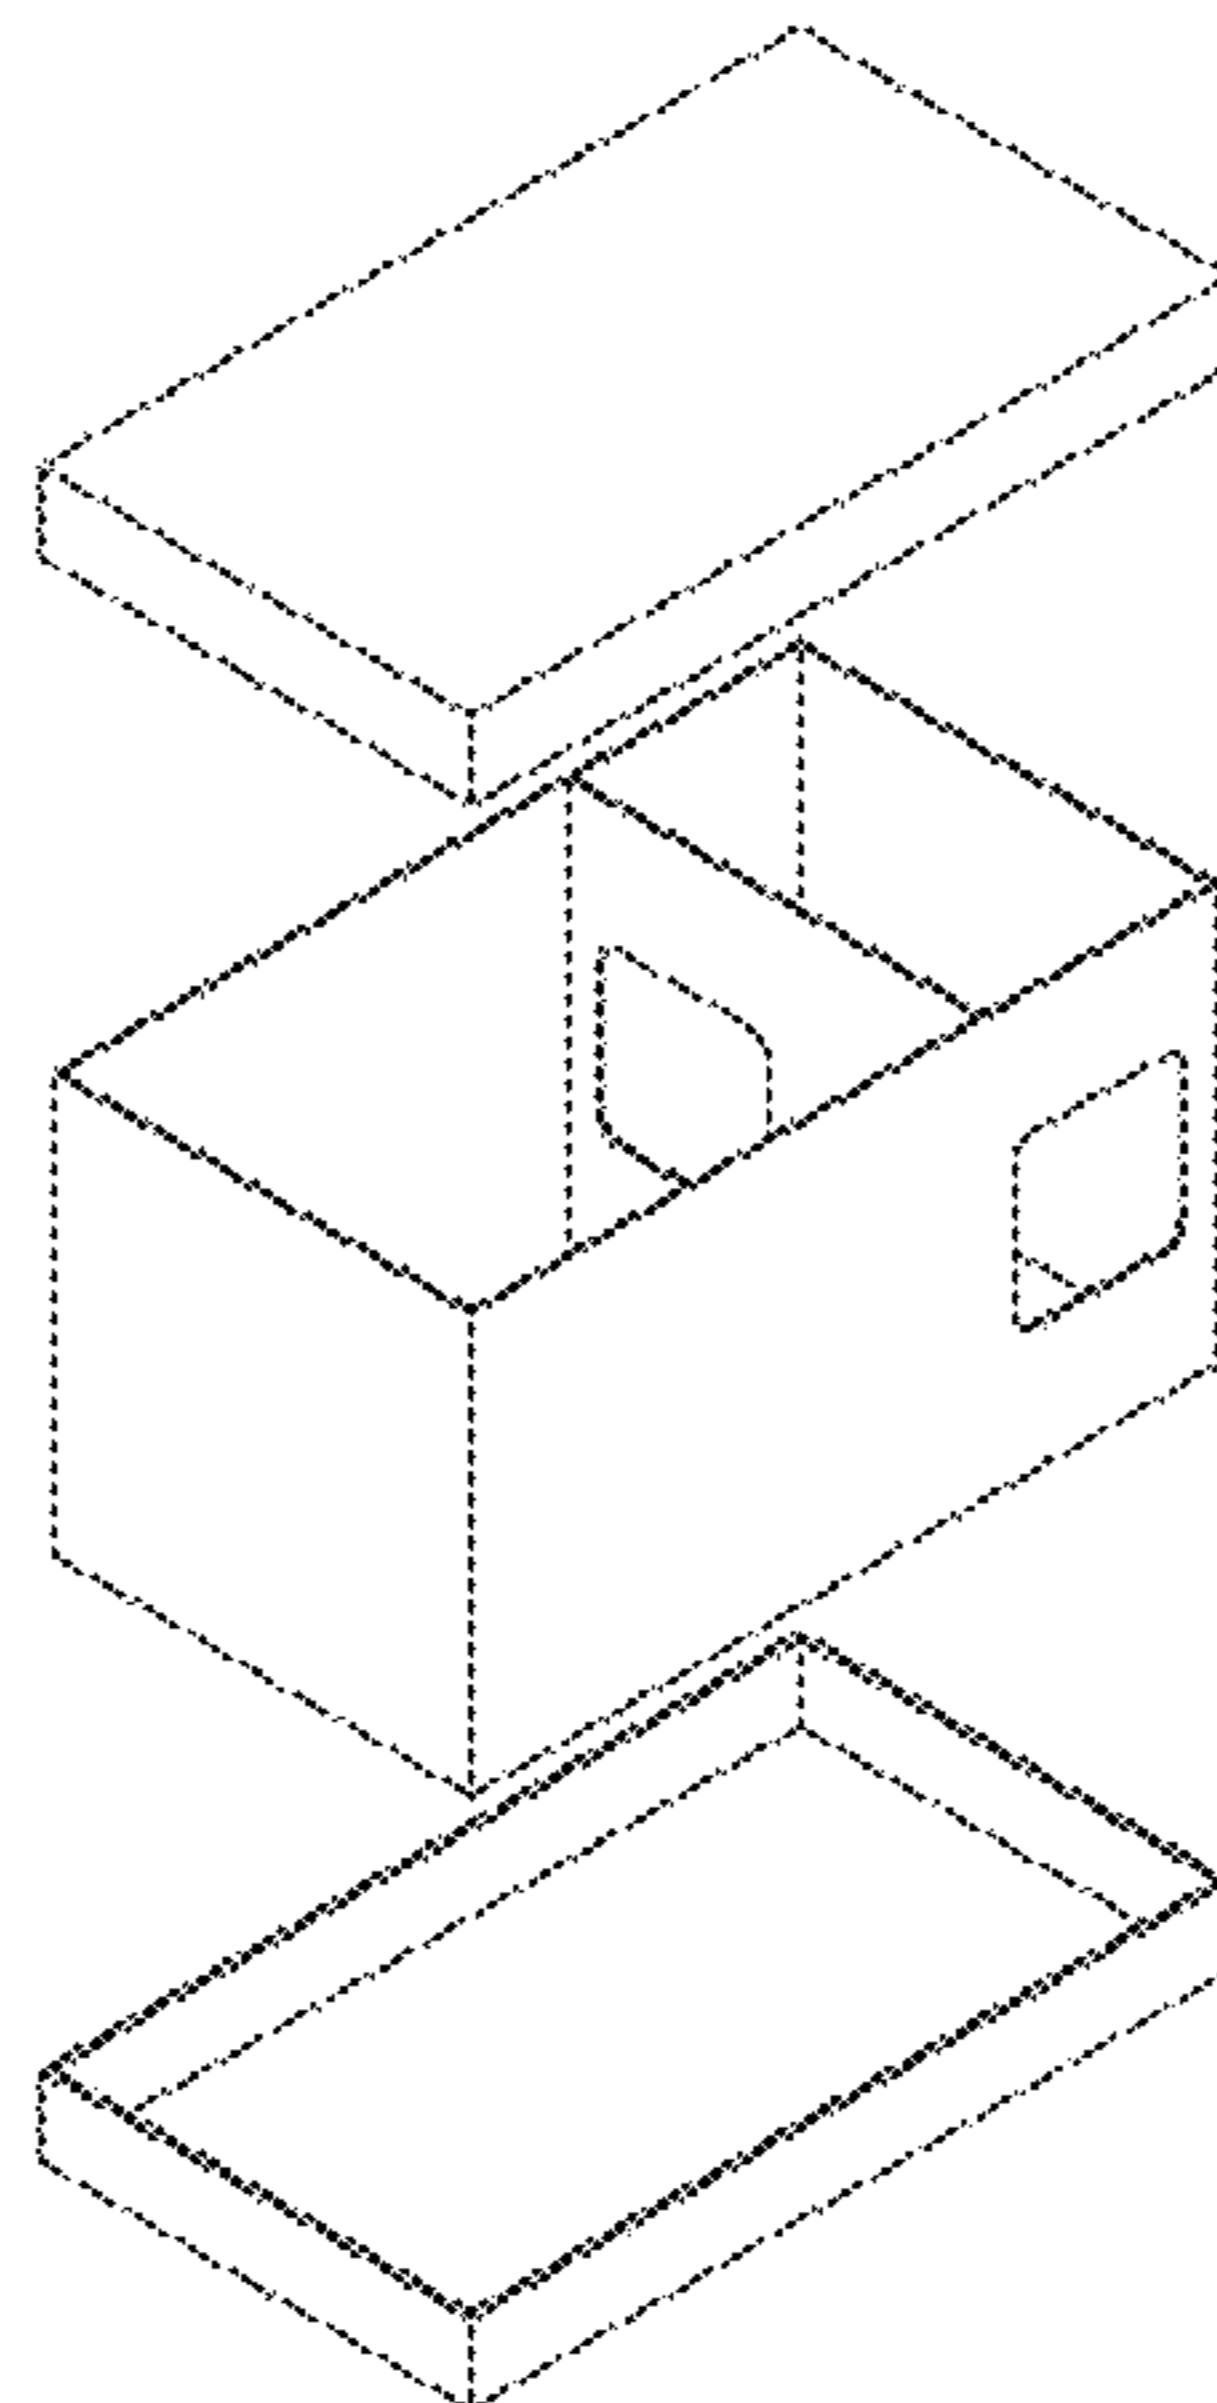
is an exploded perspective view of the cat litter box enclosure design shown in FIGS. 1-3, showing the front, bottom, and right sides of the cat litter box enclosure.
